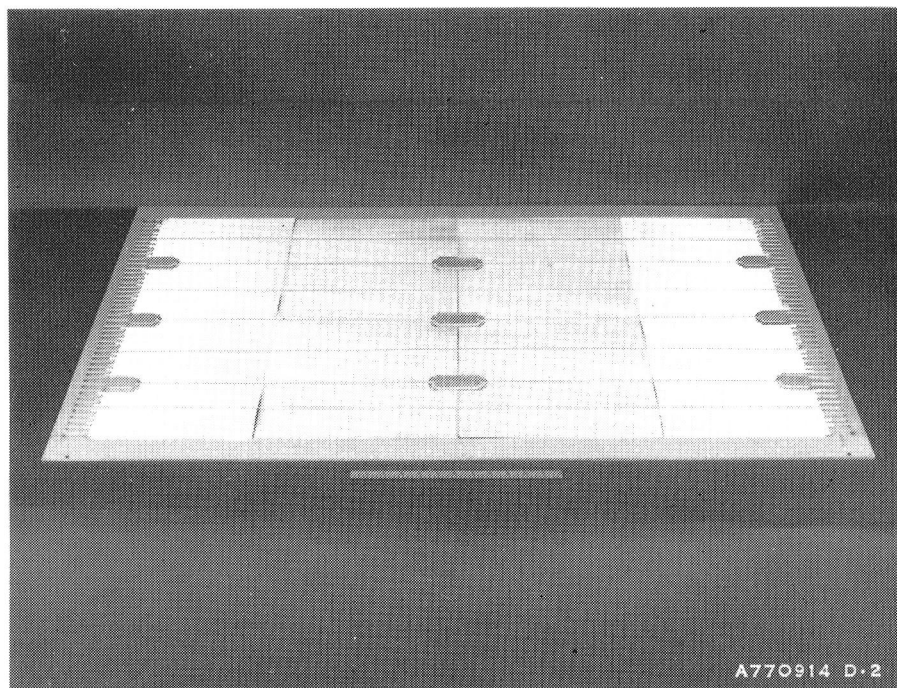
TA Sandwich Internal Details Assembled Prior To Closure
